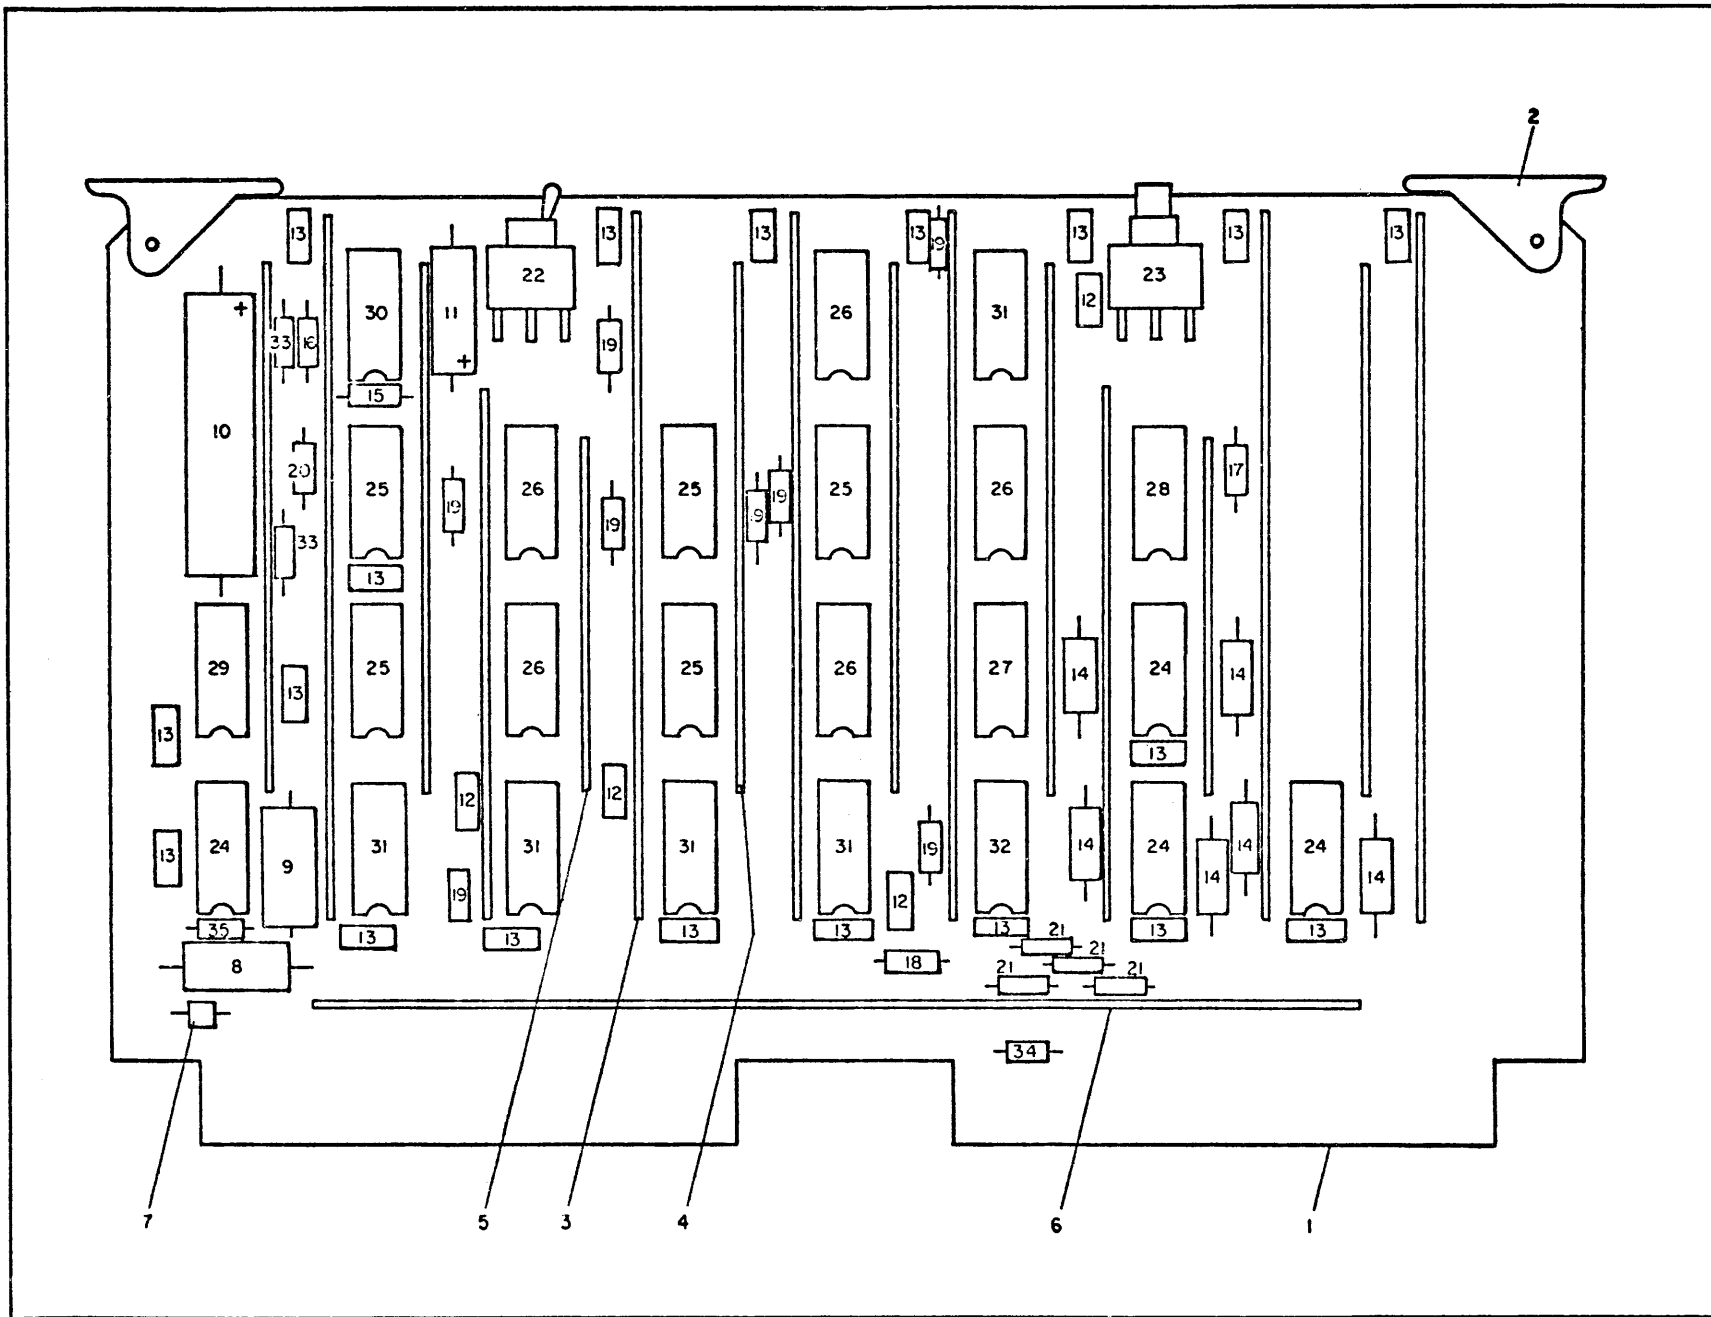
PC ASSEMBLY - ERROR CARD
